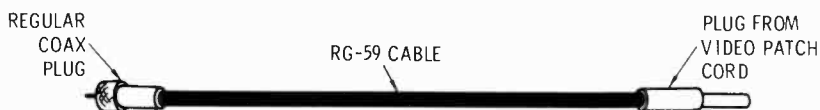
A scope cable made with RG/59 coax cable and the plug from a regular video patch cord.
